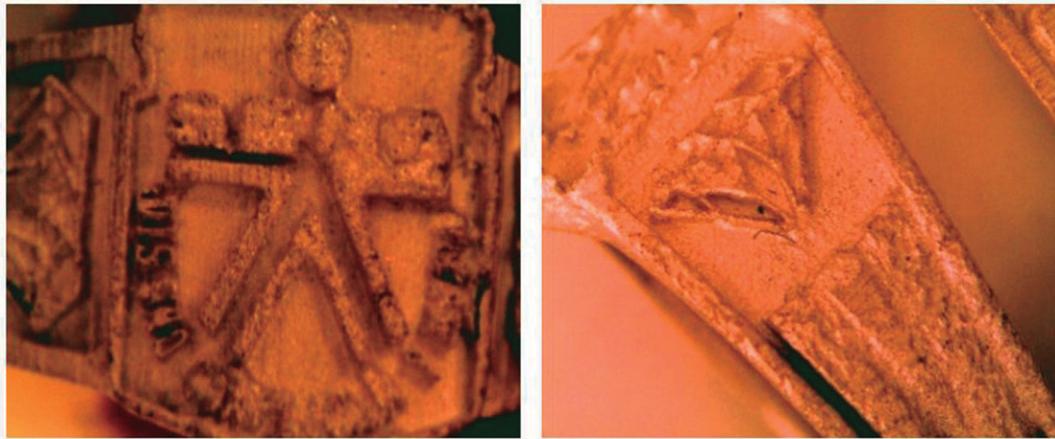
Surface details of castings printed with Epic 2000 resin under rapid burn conditions.
